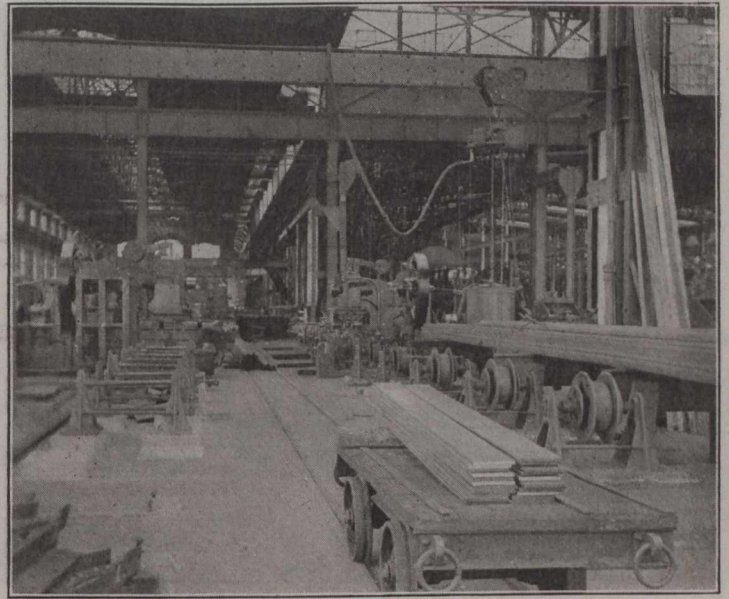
Punch for Handling Steel Car Z Bar Sections.
